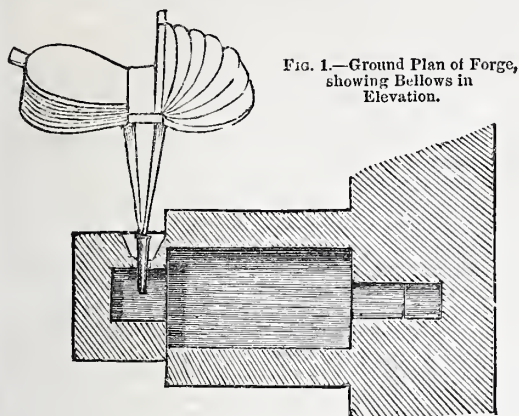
Ground Plan of Forge, showing Bellows in Elevation.
